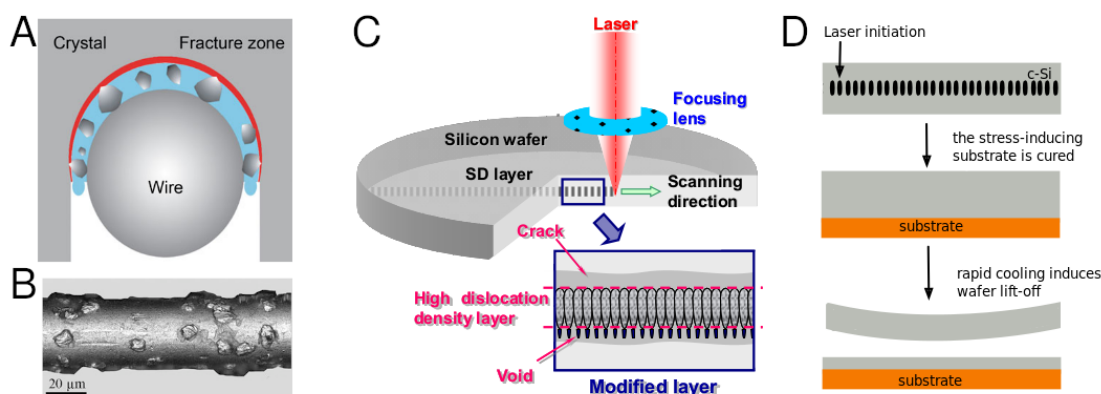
(a) Schematic view of the slurry-based cutting method [25]. (b) Diamond-coated wires for fixed-abrasive cutting method with electroplating bonding [26]. (c) Stealth Dicing laser processing [27]. (d) Basic spalling process for SLIM-cutting.
